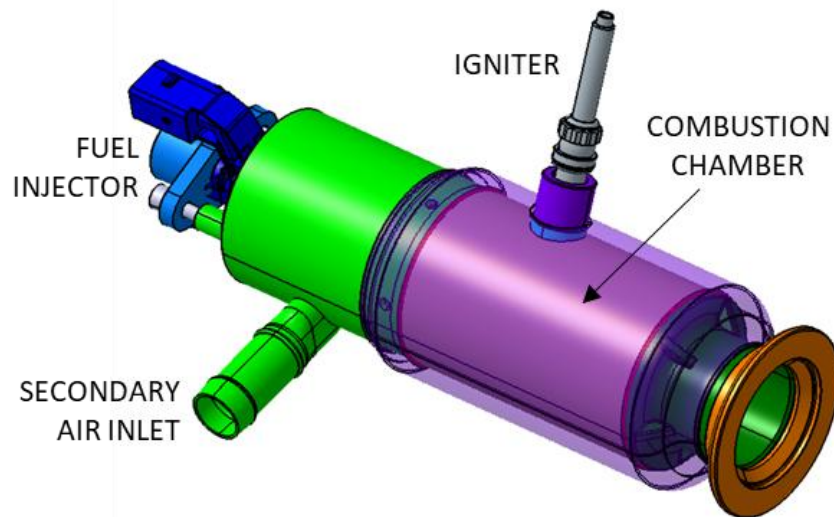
Burner preliminary design: CAD model of the outer shape.
